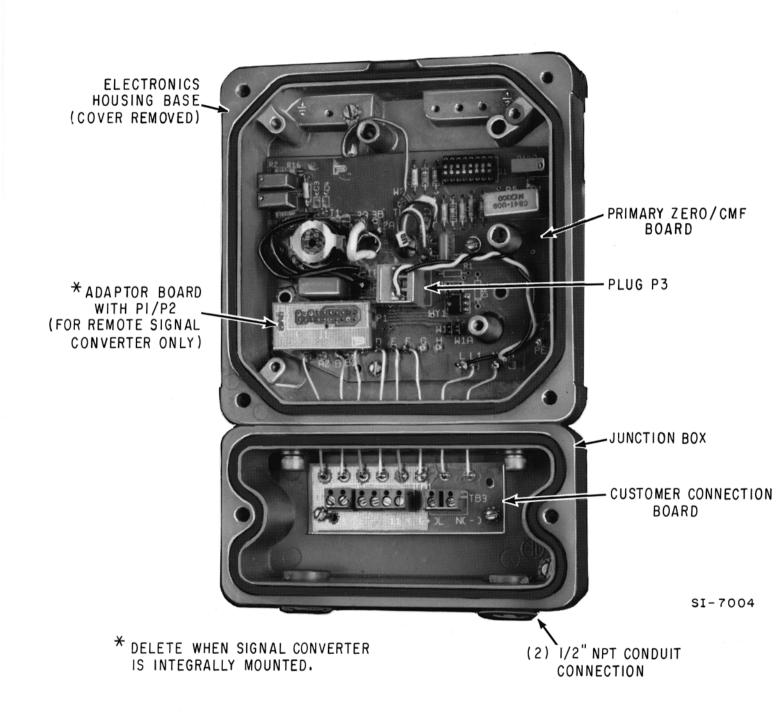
PRIMARY MOUNTED PC ASSEMBLIES
